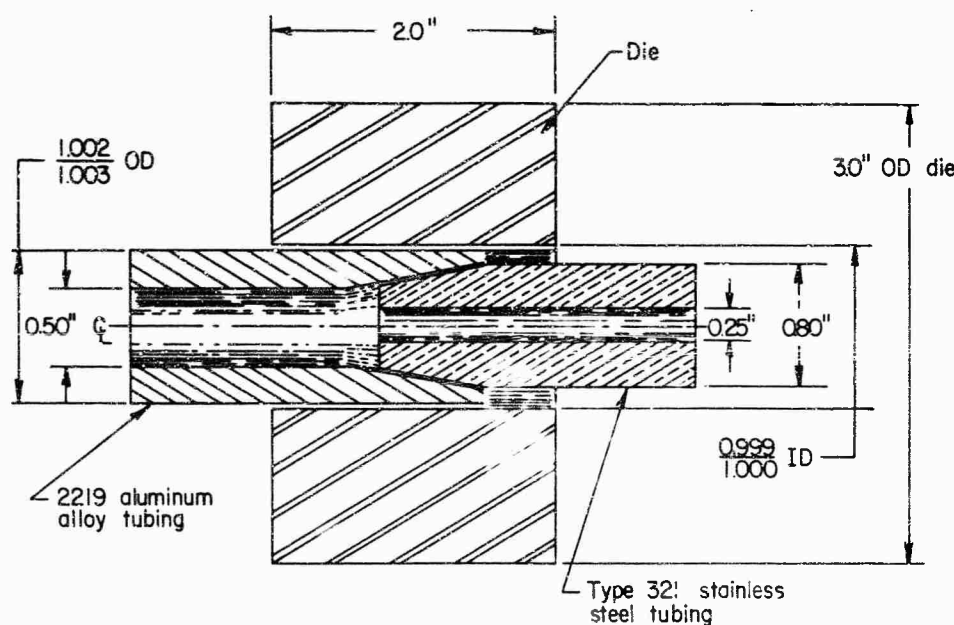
JOINT AND TOOLING ARRANGEMENT FOR DIFFUSION⁽⁵⁰⁾ WELDING DISSIMILAR-METAL TUBULAR ASSEMBLIES
